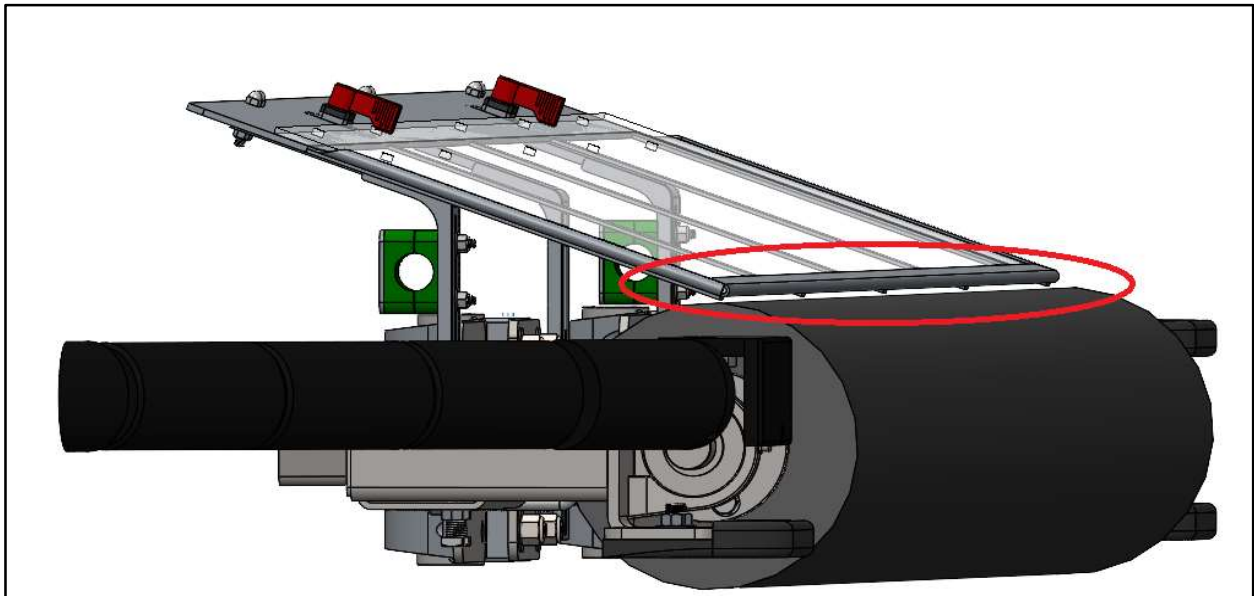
Properly mounted Tire Shine shield. Note the minimal clearance (circled) after proper mounting.
